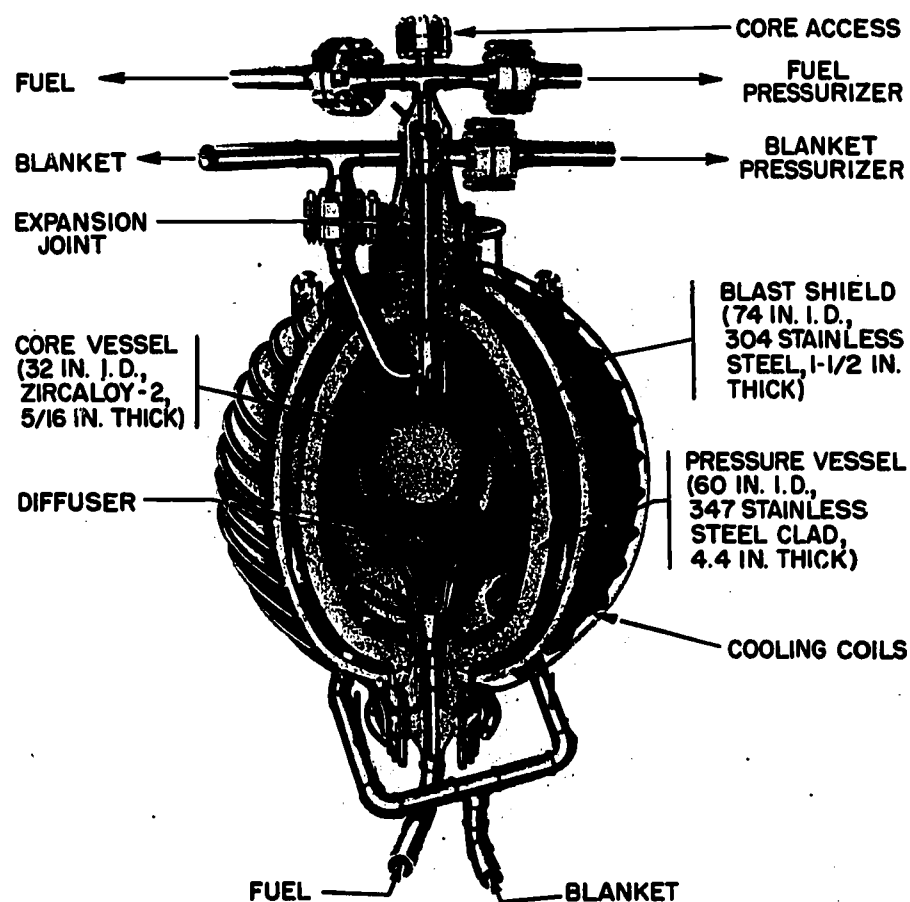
Cutaway Perspective of HRE-2 Reactor Assembly
